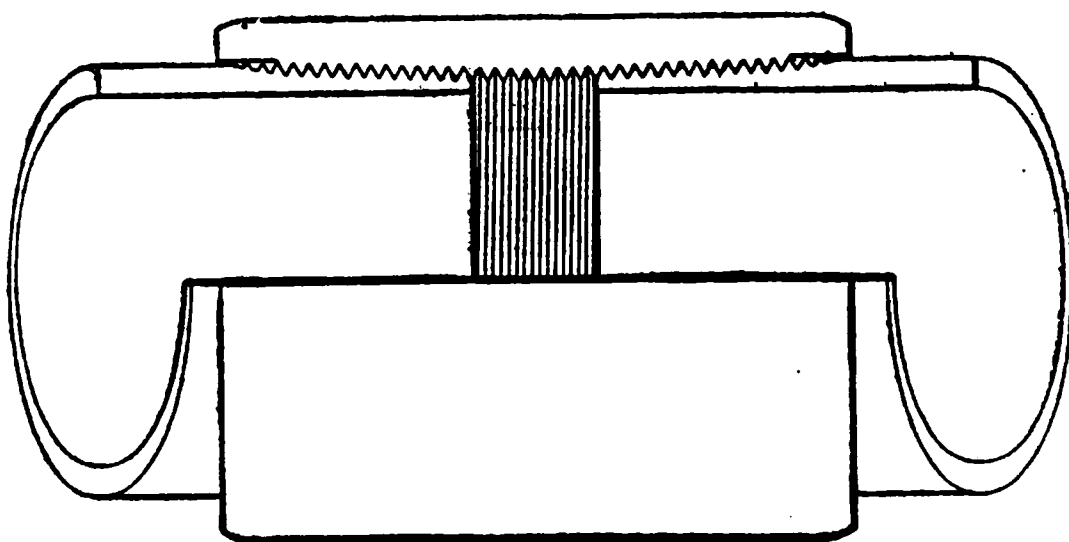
Typical Section of Full Weight Drill Pipe Coupling and Joint
